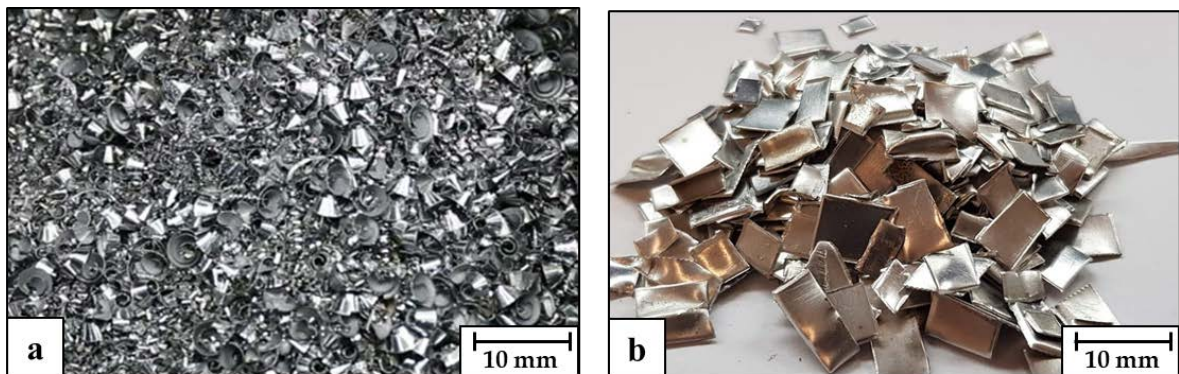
(a) Metal chip and (b) sheet metal scrap.
